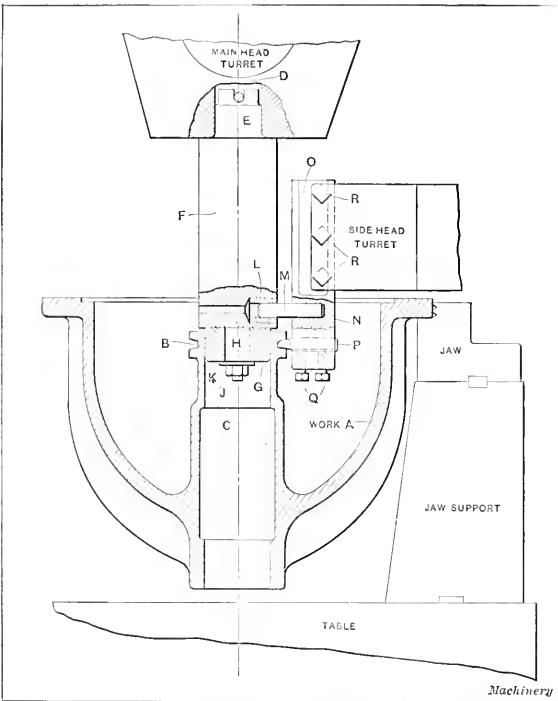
An Arrangement for cutting a Groove on the Outside of a Sleeve
